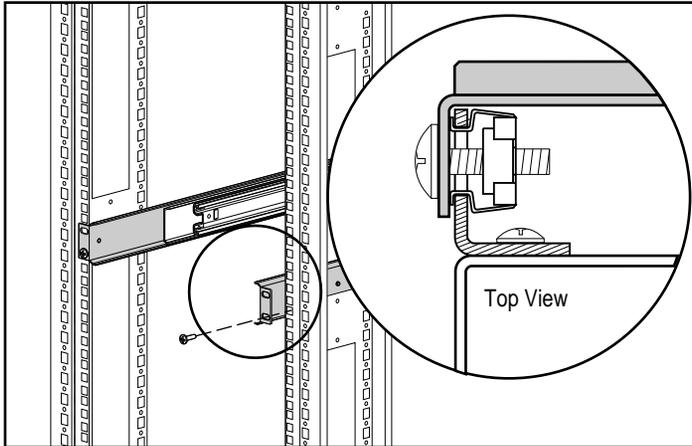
Cage nut and back of mounting bracket assembly installed
